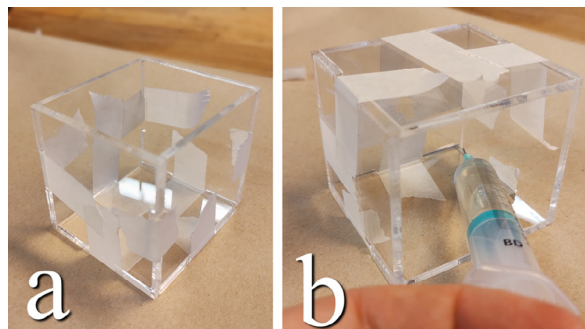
a) Assemble acrylic pieces with tape. b) Apply acrylic glue along inner edges with syringe.
